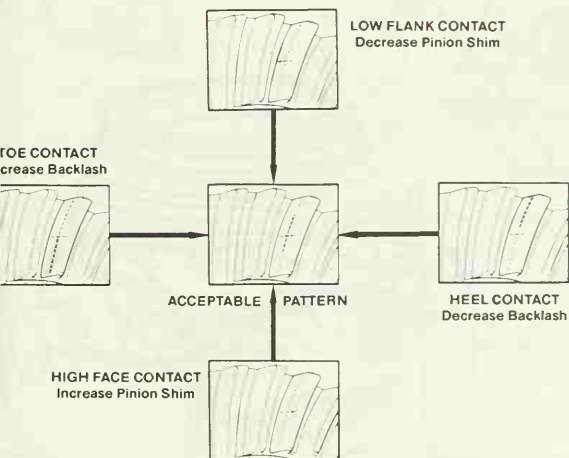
The gear tooth pattern is compared to a pattern chart to determine if a correction is necessary. (Cadillac Motor Car Division of General Motors Corporation)
